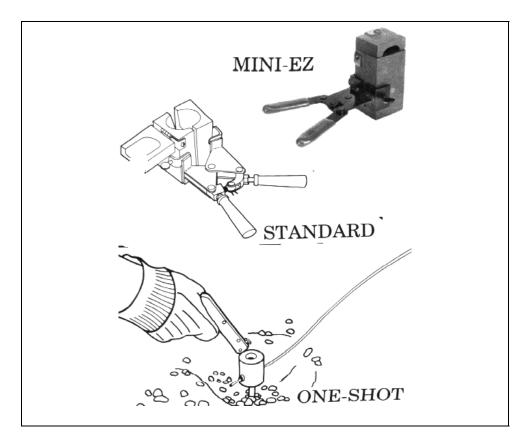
Examples of the Tools Used to Make Exothermic Welds
